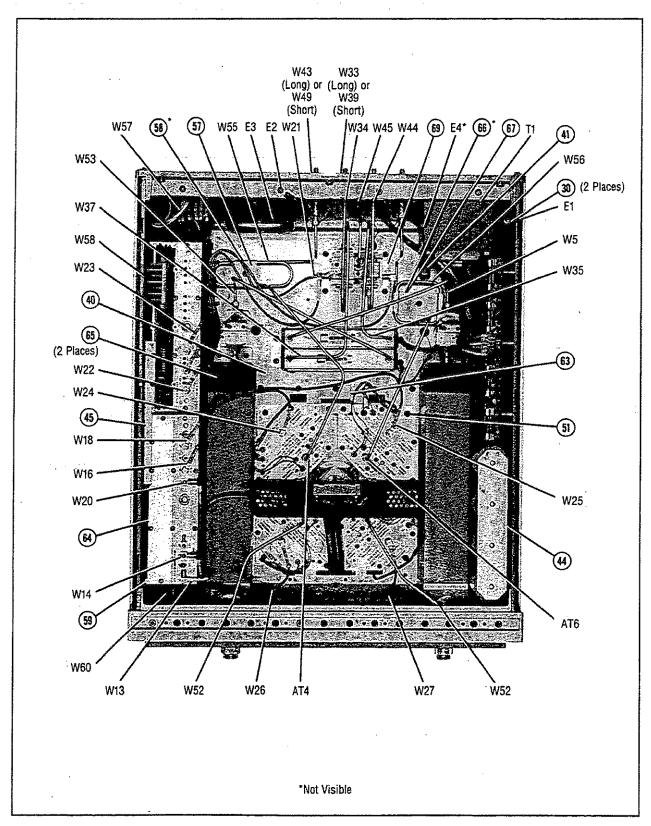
HP 8515A Miscellaneous Mechanical, Chassis, and Electrical Parts (4 of 5)
